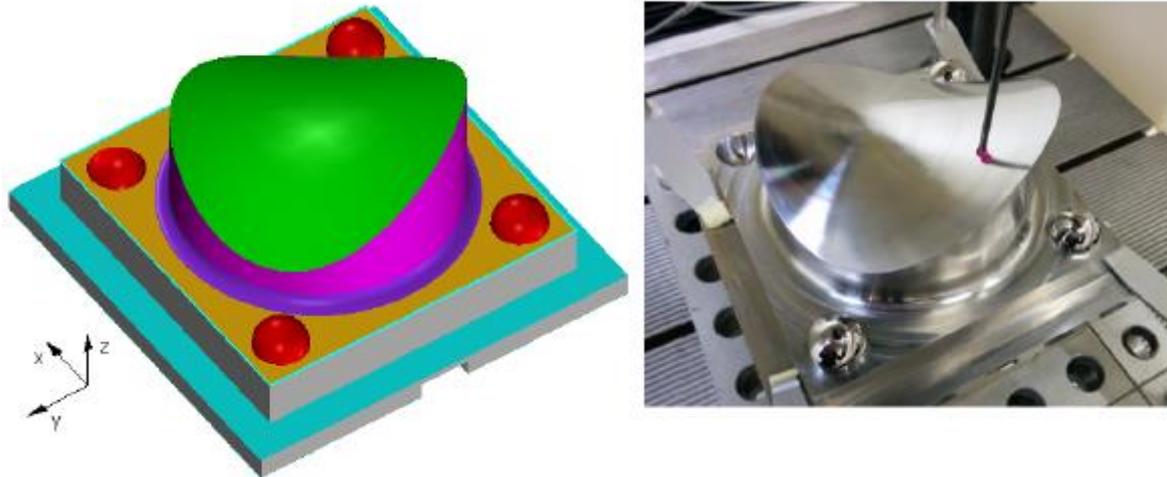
CAD model of FF-MS Hyperbolic paraboloid (left) and manufactured standard (right)
